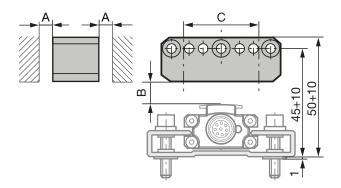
Dimensions and distances with BTL5-P-5500-2 magnet
